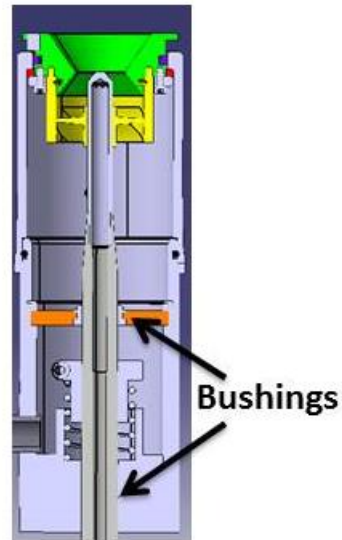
Bushing that fuel injector slides in. The top bushing is an aluminum insert into the sintered disc (orange). The bottom bushing is a precision bored hole polished to reduce friction and wear.
